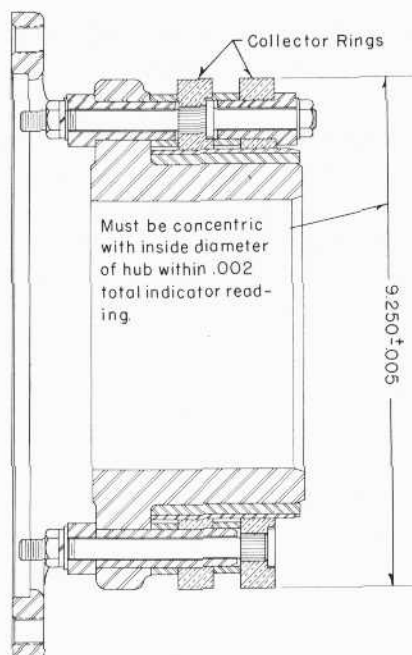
D14 Alternator Collector Ring Compressor Coupling Adapter Assembly
